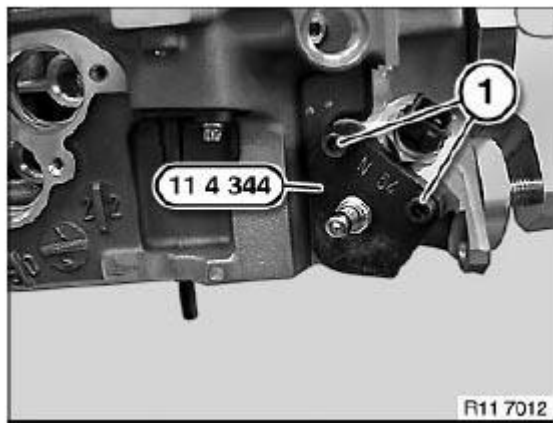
Identifying Special Tool (11 4 344) With Screws
